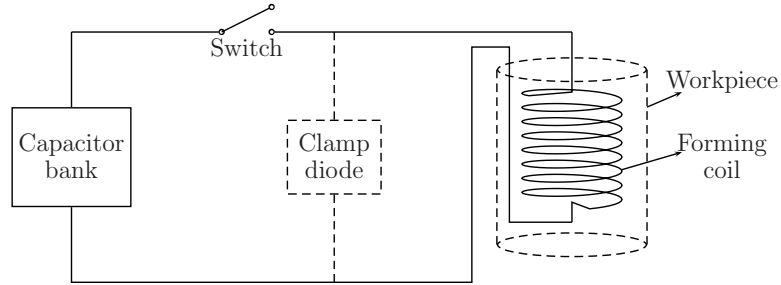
Electromagnetic forming system for expansion (bulging) of hollow cylindrical workpieces.
